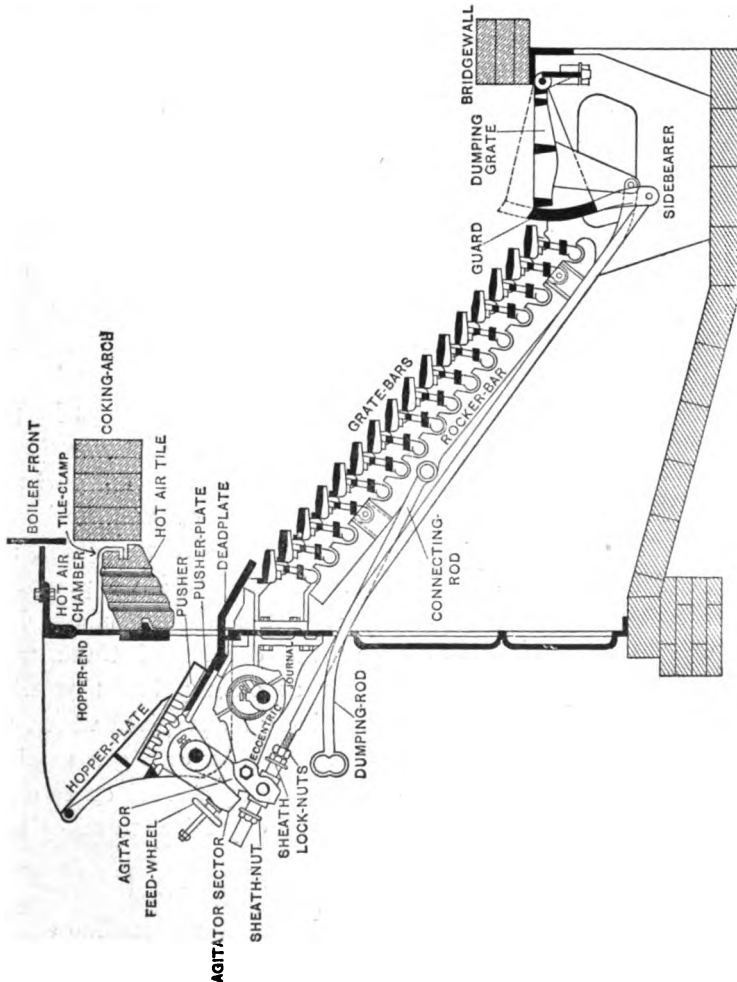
Details of Construction of Roney Mechanical Stoker.
